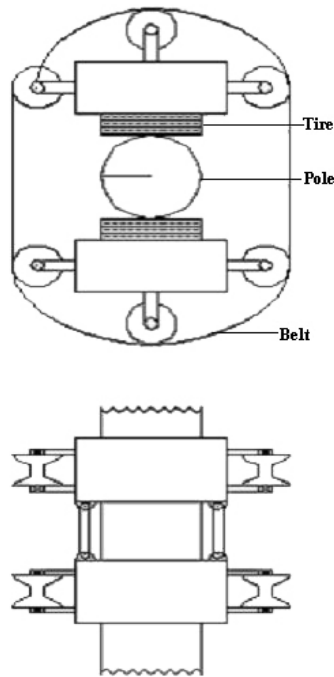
The belt pushing climbing concept can adapt to a big range of section sizes and shapes of the pole.
